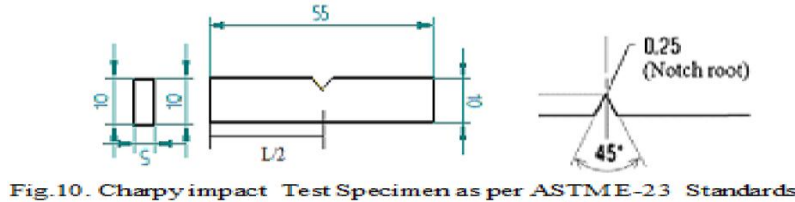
Charpy impact Test Specimen as per ASTM E-23 Standards
